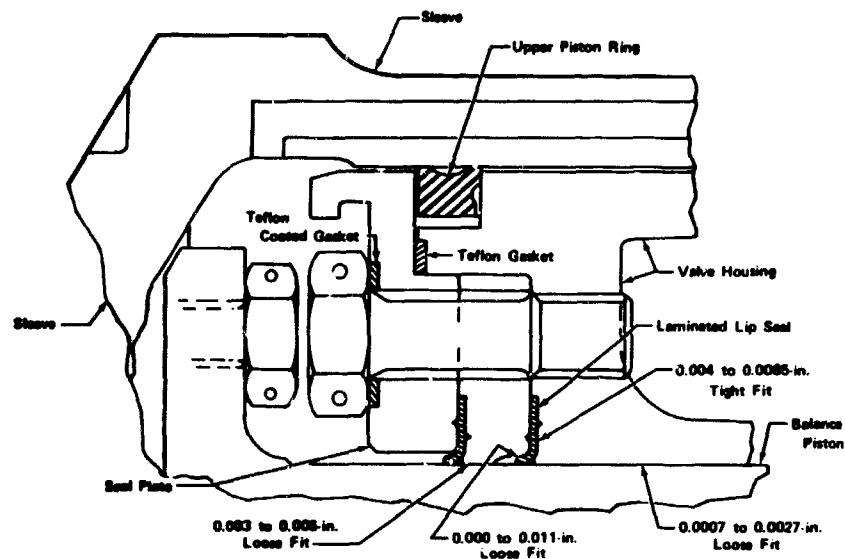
Balance Piston Lip Seal Package and Upper Piston Ring
